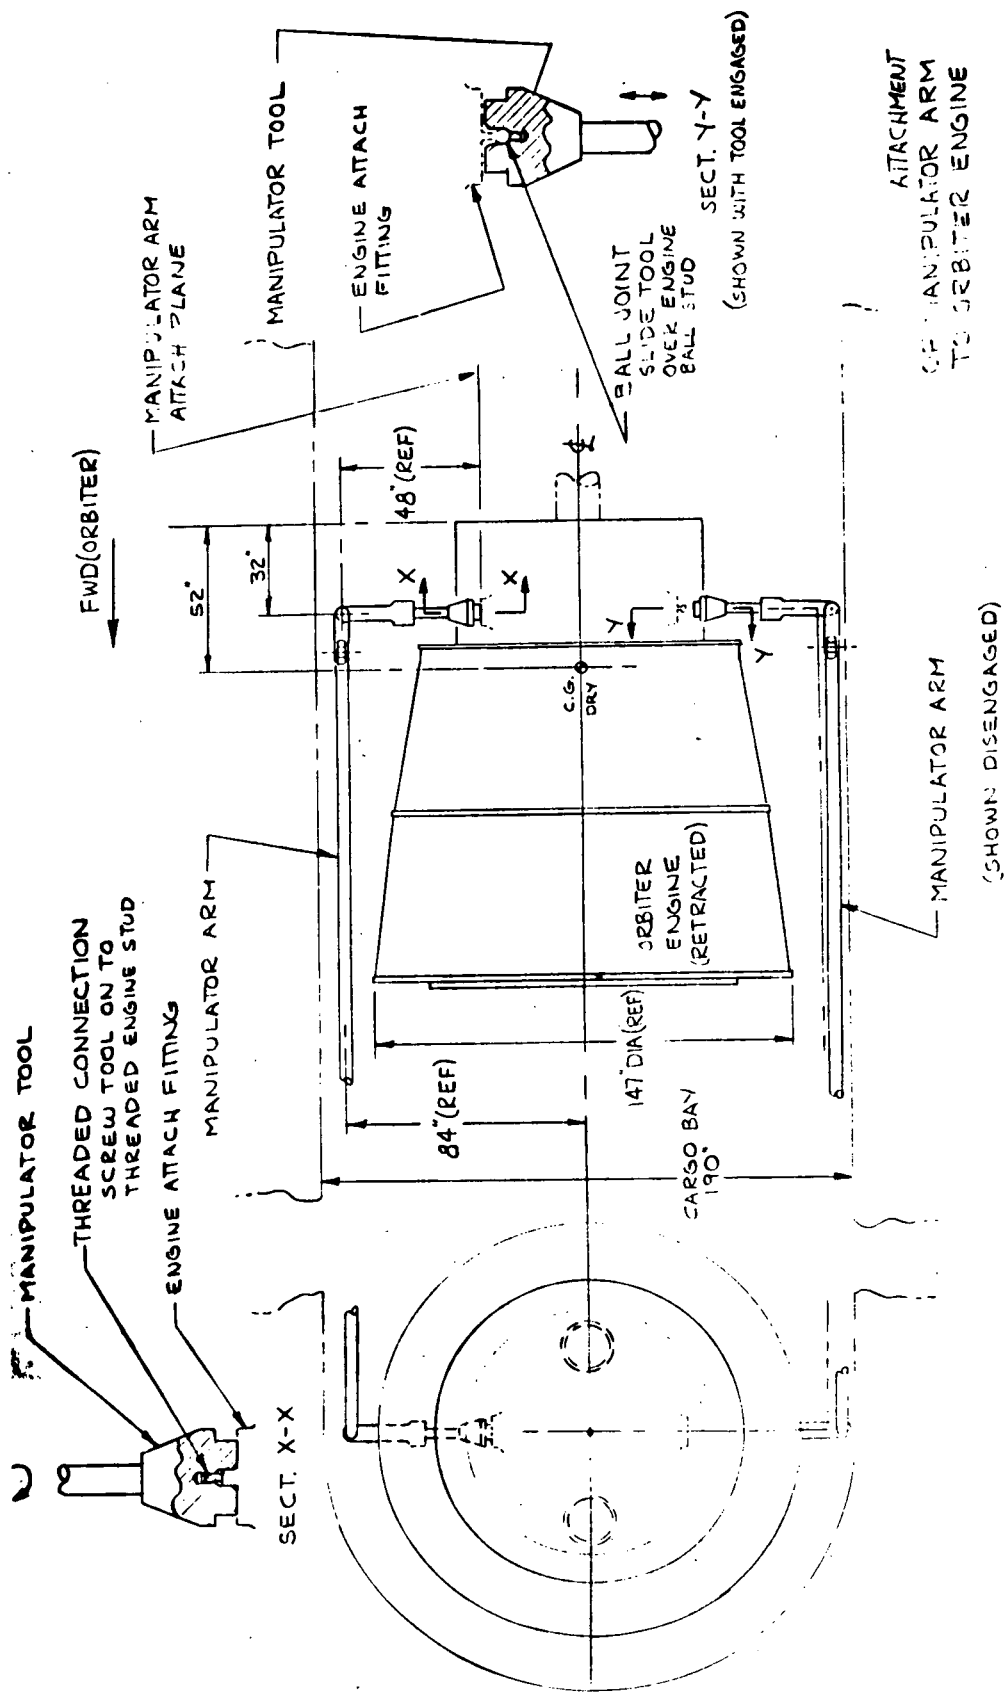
Manipulator Arm Attachment to Orbiter Engine
